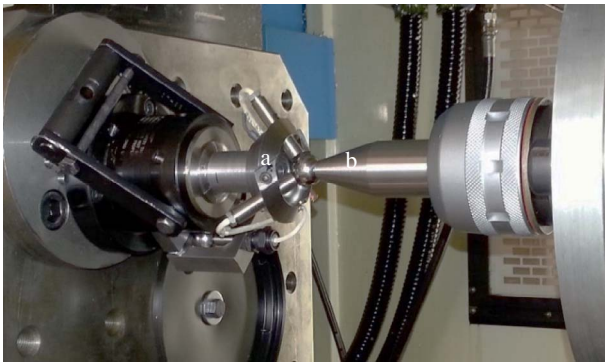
Capball mounted onto the machine work table (a) and the master ball mounted onto the spindle head (b).
